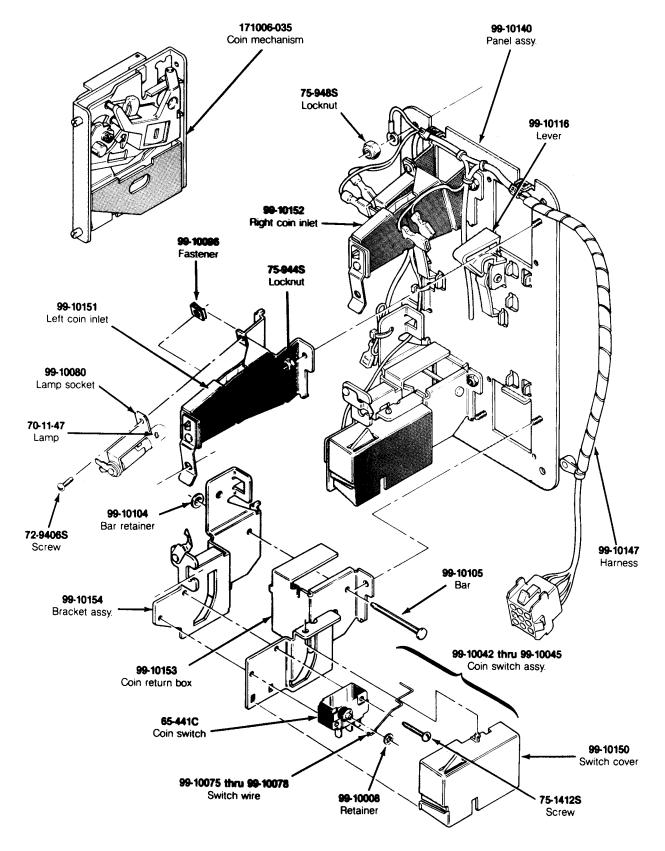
American-Made Coin-Door Assembly 171027-001 A
